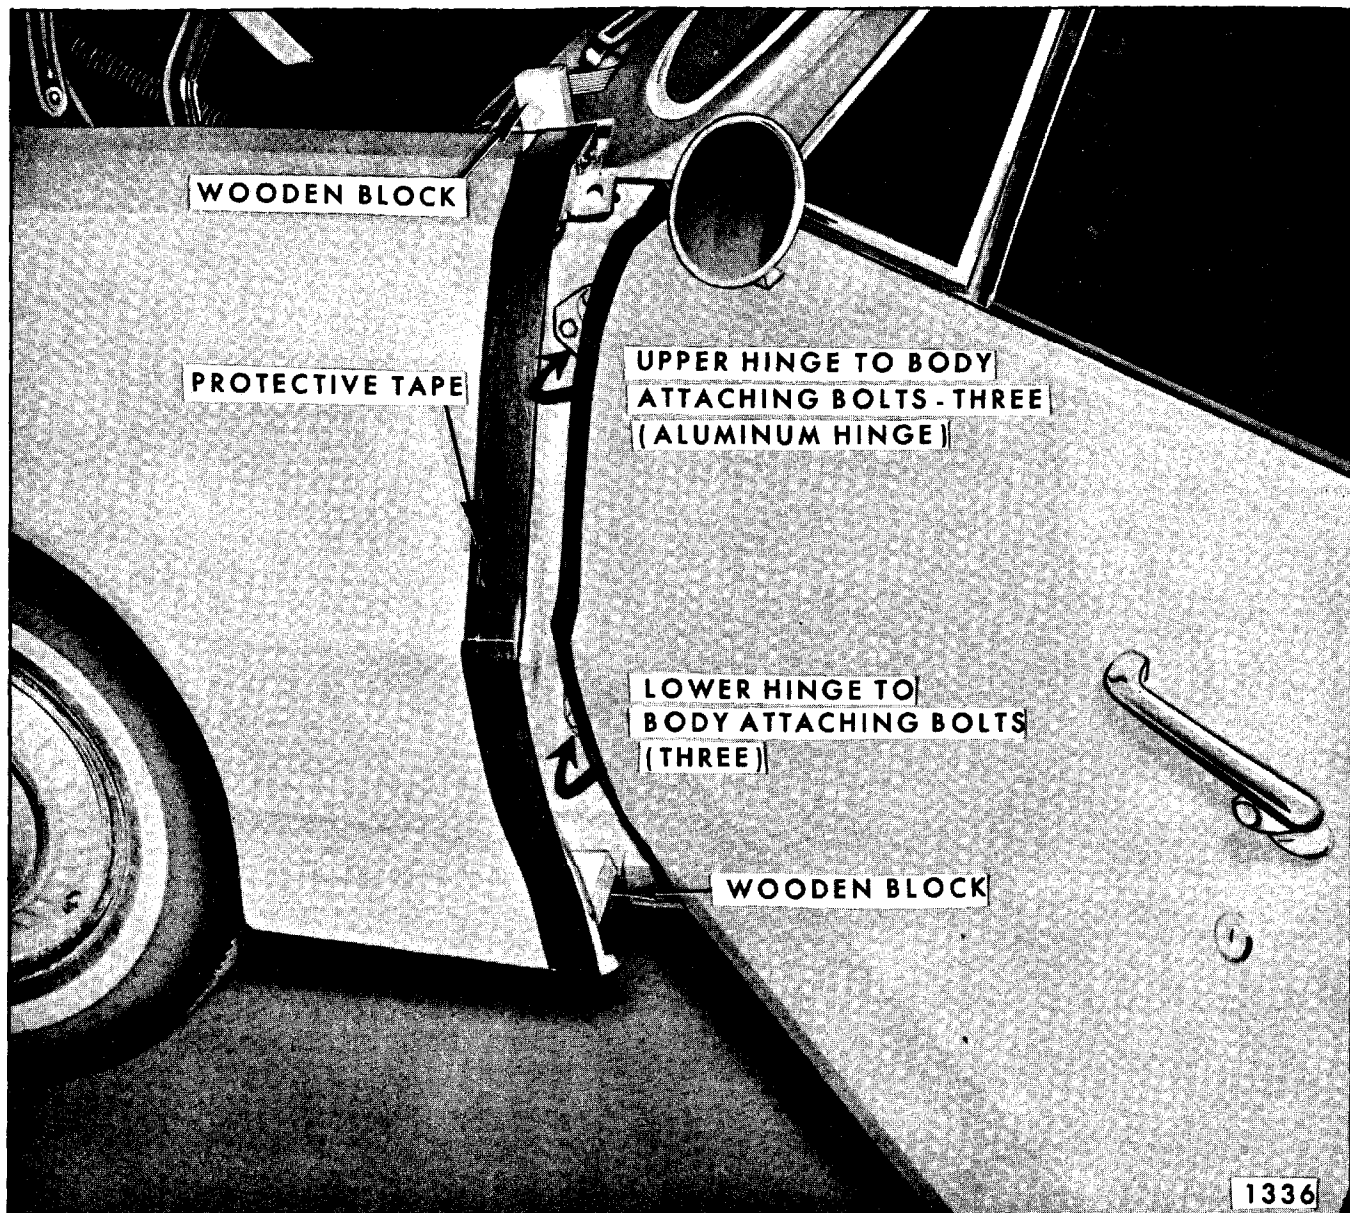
Front Door Hinge Attachment - "A" Styles
